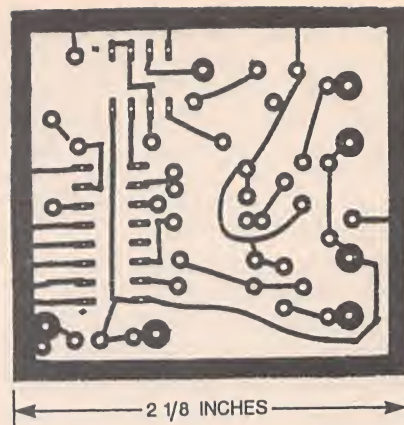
The digital portion of the receiver was assembled on a single-sided, printed-circuit board, a full-size template of which is shown here.
